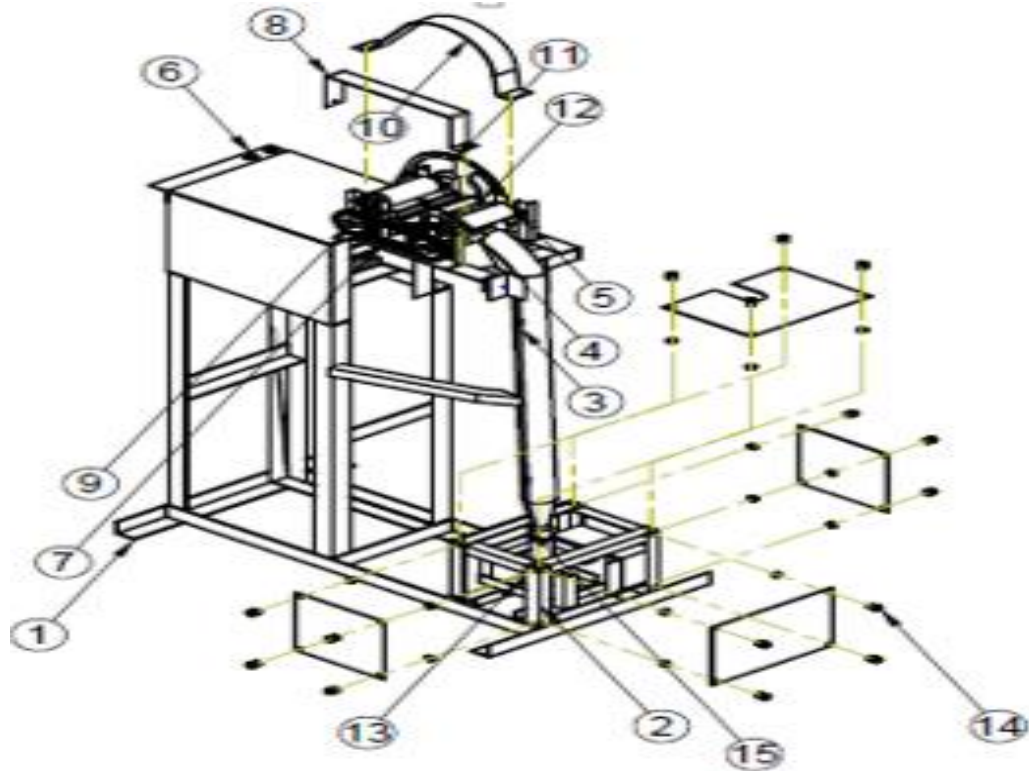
Exploded view of the knife edge peeling-tethering machine for palm broom production with 1-15 as its frame, tethering motor, stockpile, stripping blade, roller, regulator, chain, chain guard, sprocket, belt guard, pulley, deflector, stationary core, bolt and sleeve respectively.
